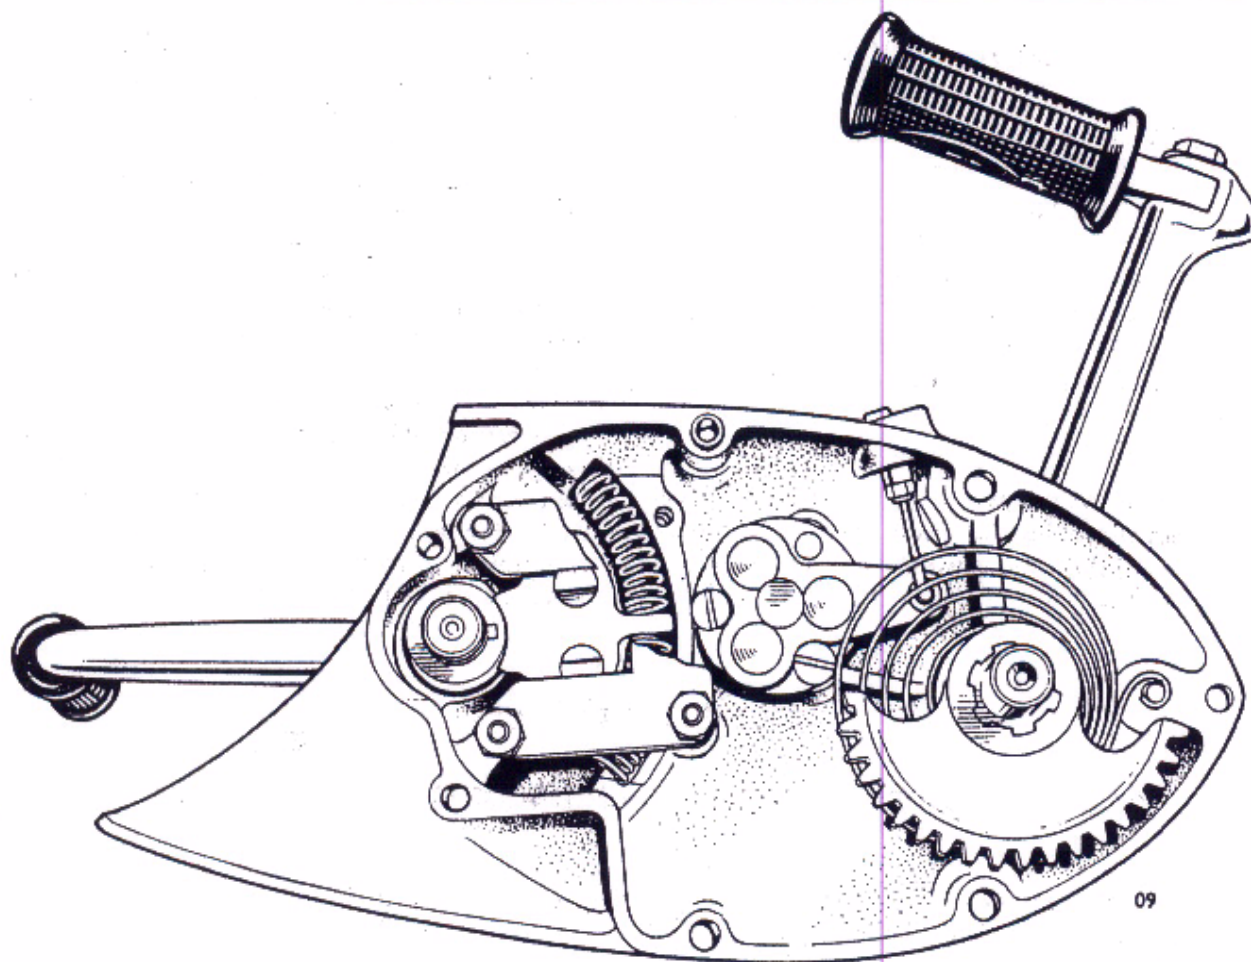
Gearbox outer cover, showing gearchange mechanism, clutch operating mechanism and kick-start quadrant
